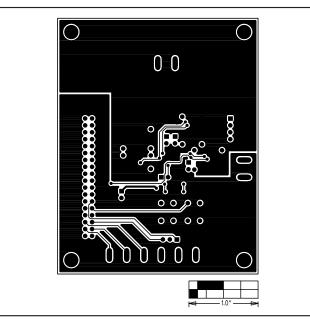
MAX5581 EV Kit PC Board Layout—Solder Side
